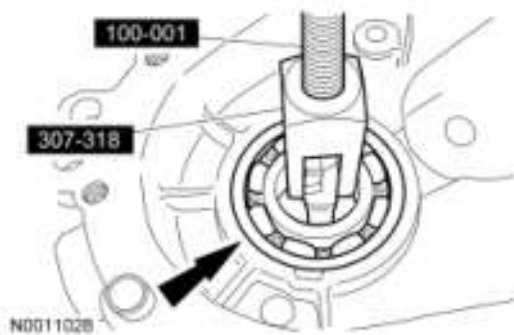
Locating Front Output Shaft Support Bearing And Special Tools
